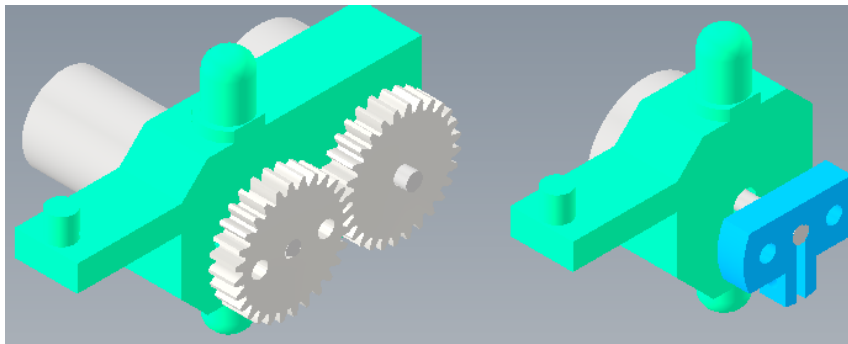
The two housing designs. Left: motor and sensor housing for the driven wheels. Right: sensor-only housing for the non-driven wheels.
